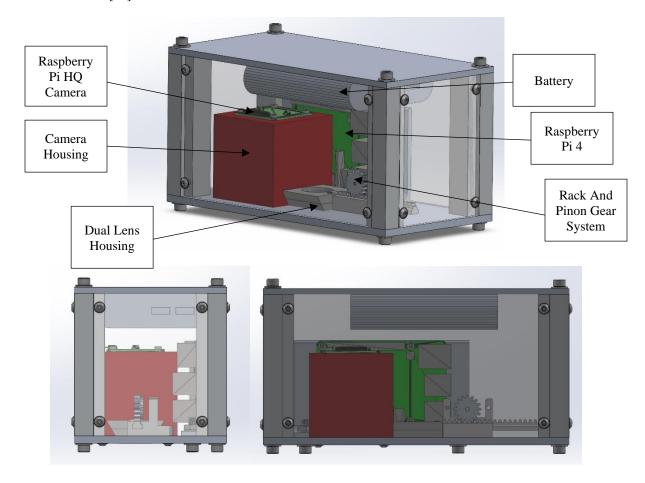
Isometric View (Top), Side View (Bottom Left), and Front View (Bottom Right) of the Single Camera System [22].
